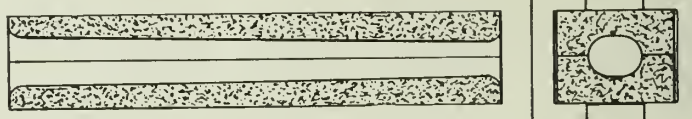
END AND SIDE VIEW OF ARM CORES. NOTE THE CLAMP HOLDING CORE TOGETHER.
